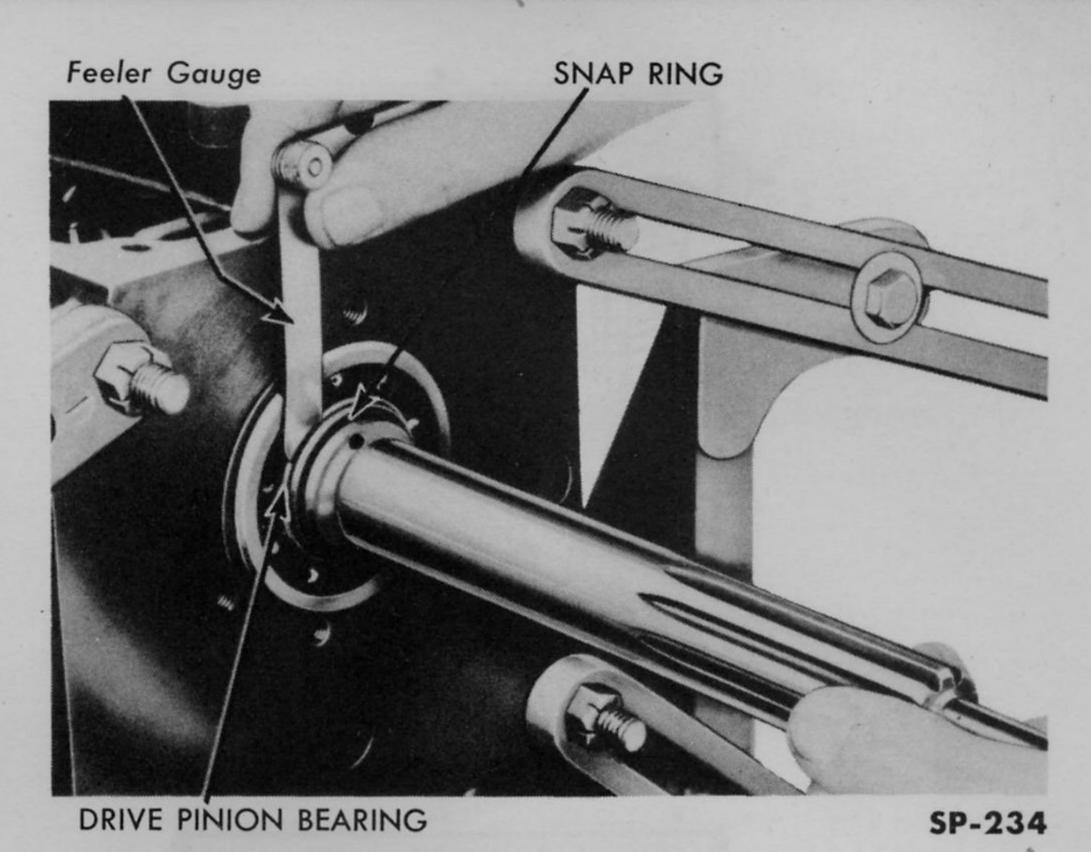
Checking Fit Of Drive Pinion Bearing Snap Ring
